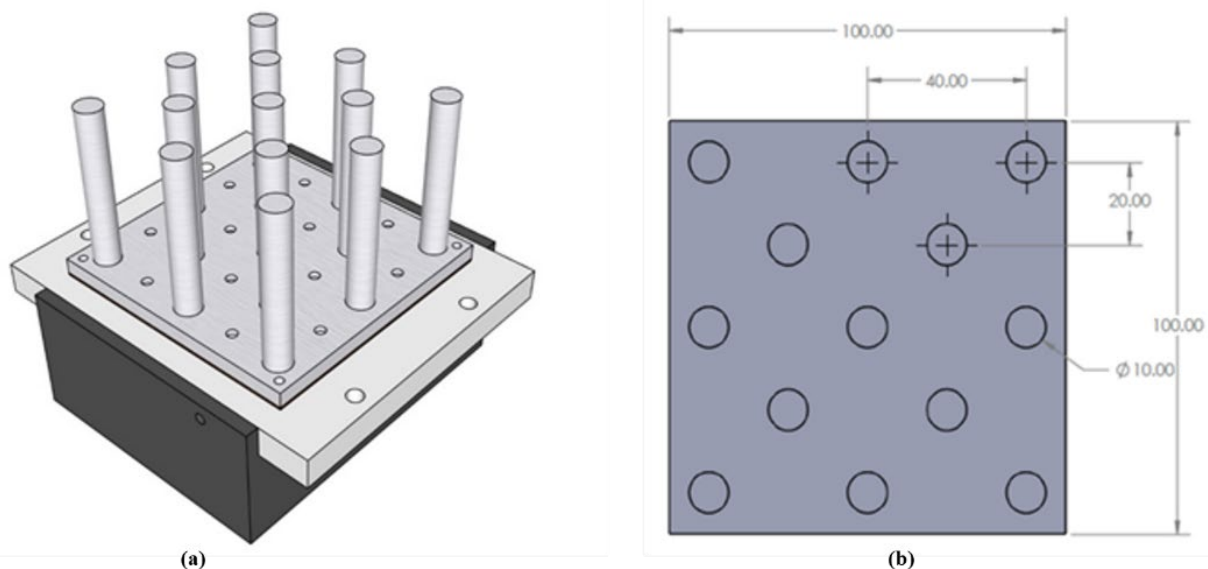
Heat sink design (a) Heat sink assembly 3D model; (b) The measurements of pins arrangement Calculations of parameters for performance analysis
